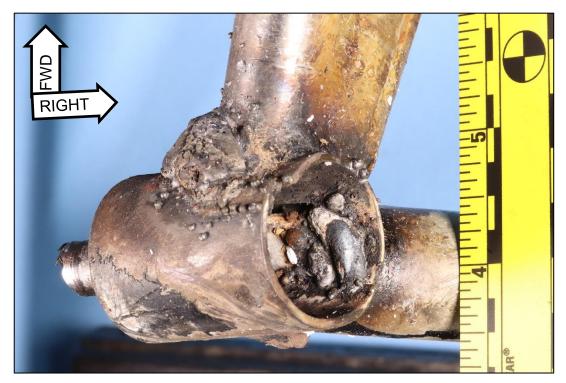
Oblique view showing the upper and interior surfaces of the right NLG actuator attachment foot.
